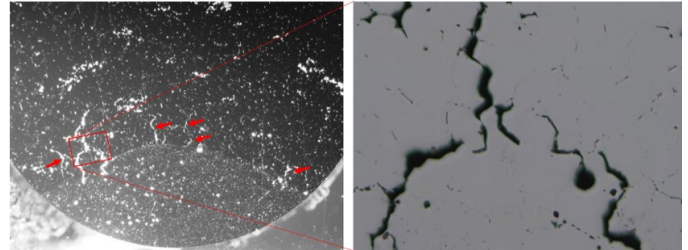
A206-nano showing cracking near the weld interface.
